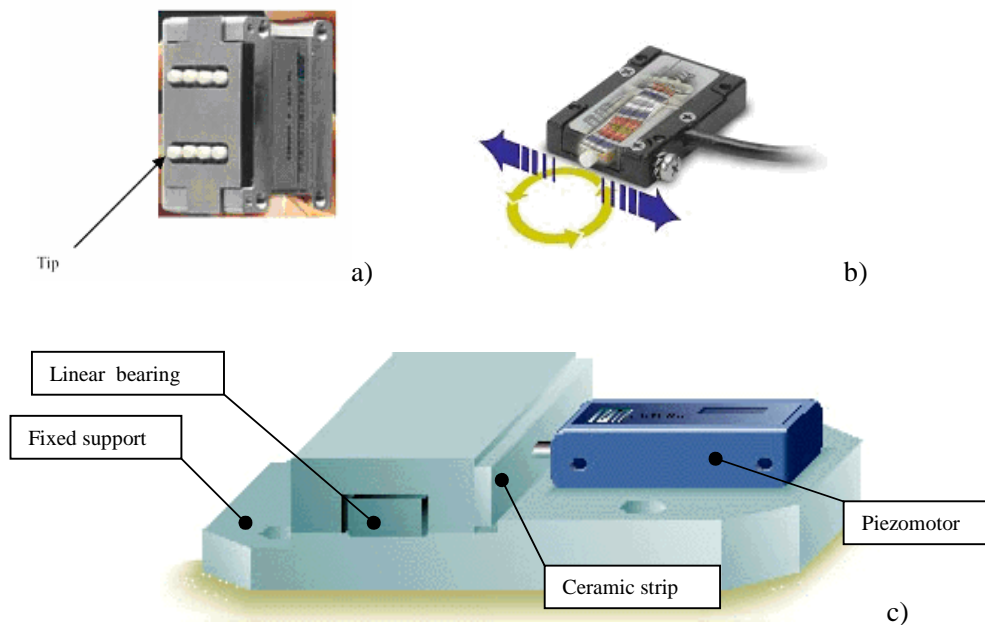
3: Detail of the designed movement system. The linear bearing is hidden by the mobile support
